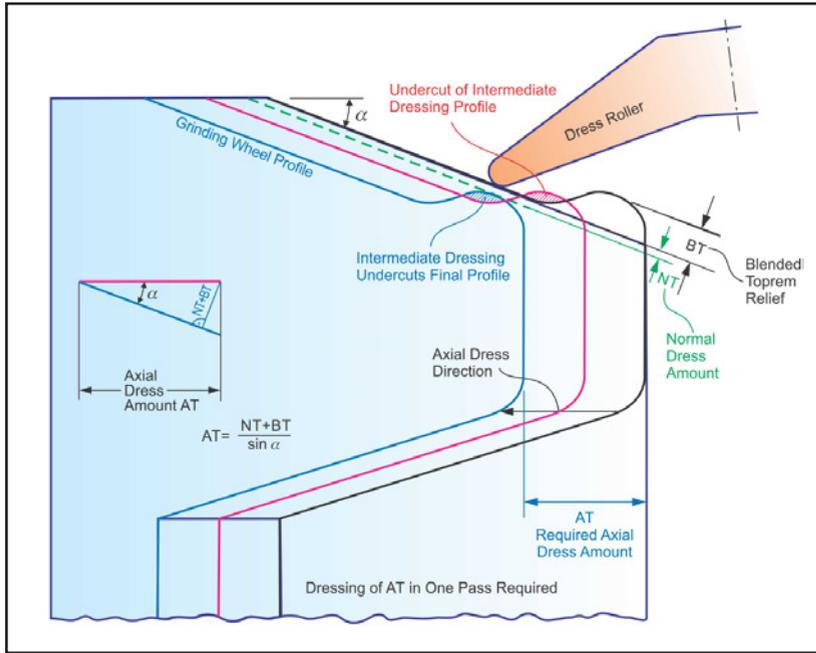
Undercut on grinding wheel profile due to blended toprem.
